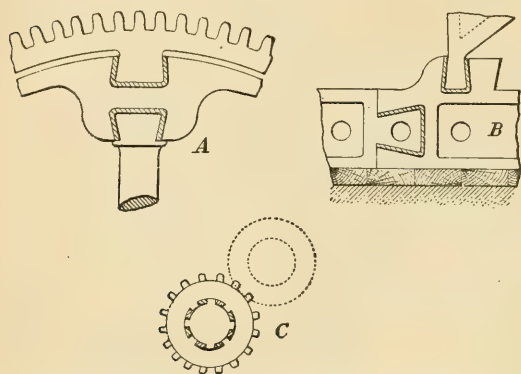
Details of Fly Wheel, Framing, and Pinions.
